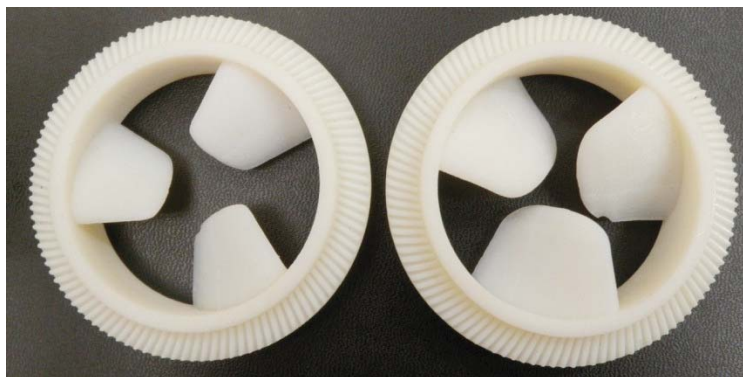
Large Blade Rim Driven Propeller Designs. These propellers are the 2nd and 3rd renditions of the blade driven design. The design for the blades of these propellers is based on the blades of a hub driven Graupner propeller.
